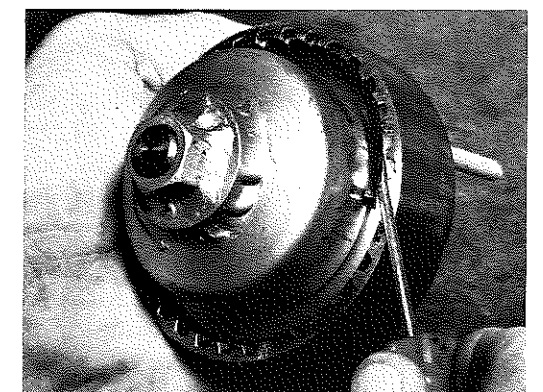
Removing clutch snap rings with clutch compressor tool.
